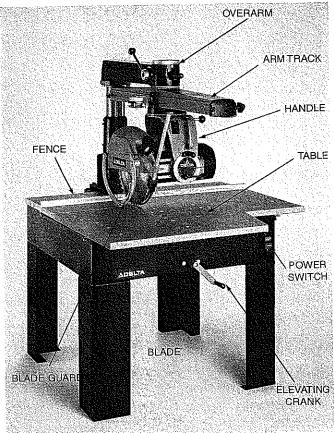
Radial arm saw with parts identified. (Delta International Machinery Corp.)
